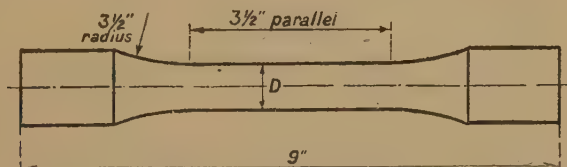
Specimen for Tensile Strength and Extension Tests on Rods.
